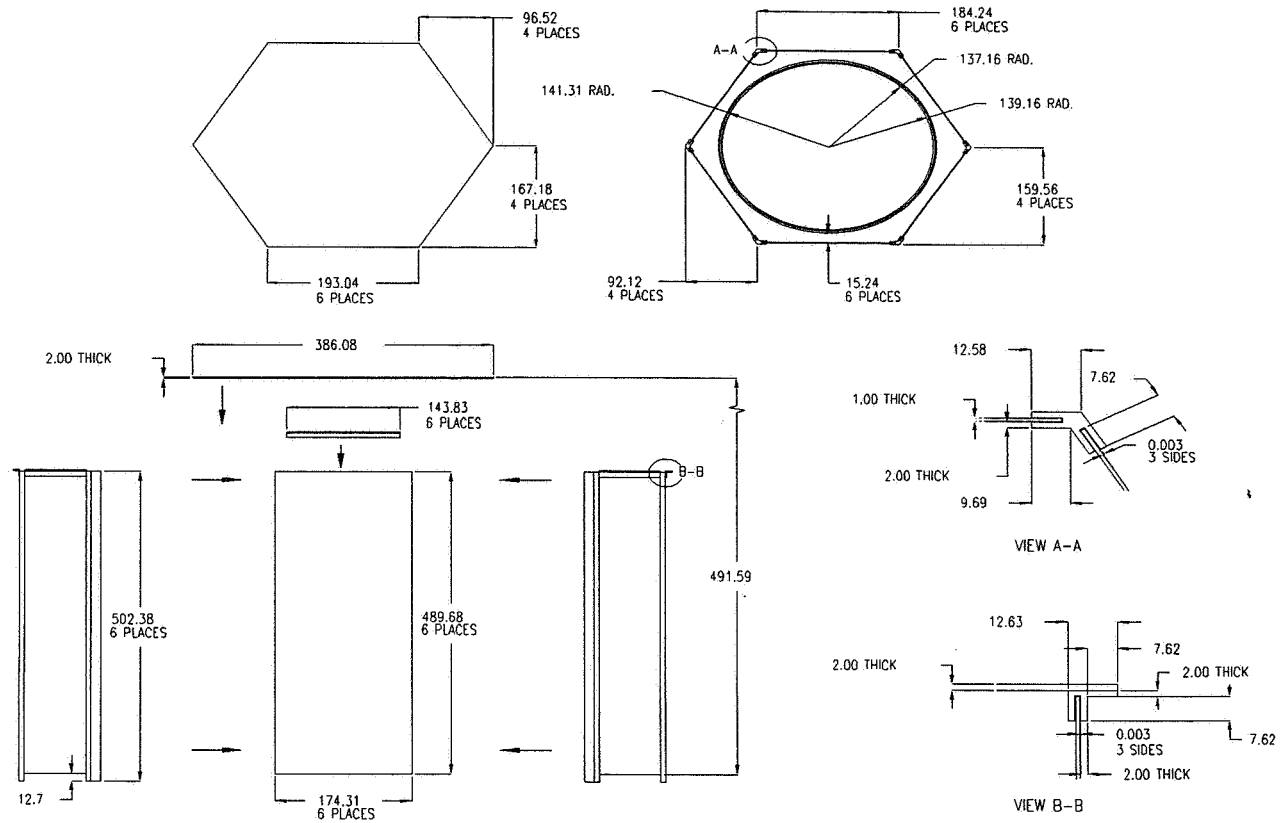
SHELL DIMENSIONS AND GEOMETRY
